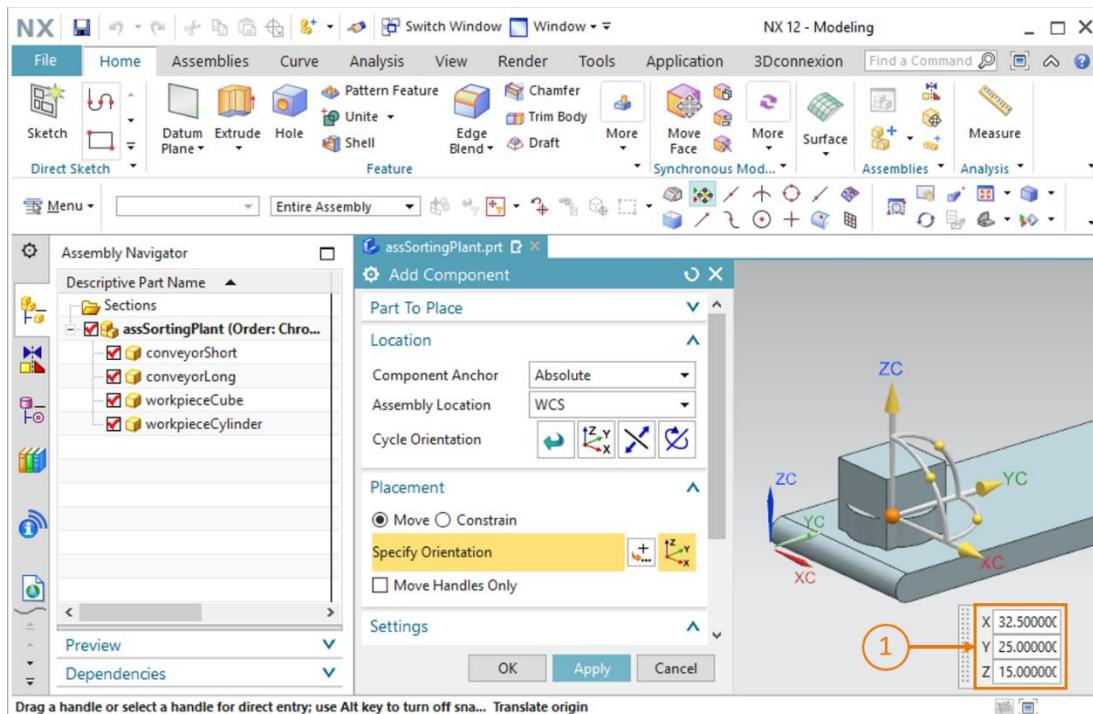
Positioning the "workpieceCylinder" model on the conveyor belt
